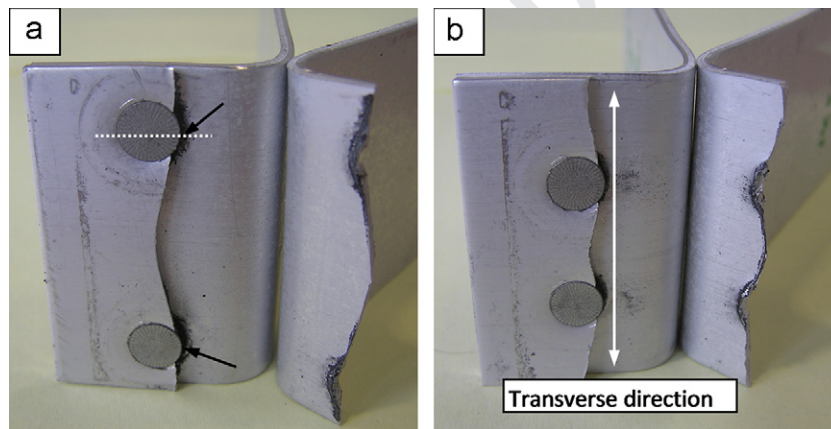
Coach-peel fatigue fracture interfaces for specimens with different edge distances: (a) 8 mm and (b) 14.5 mm.
